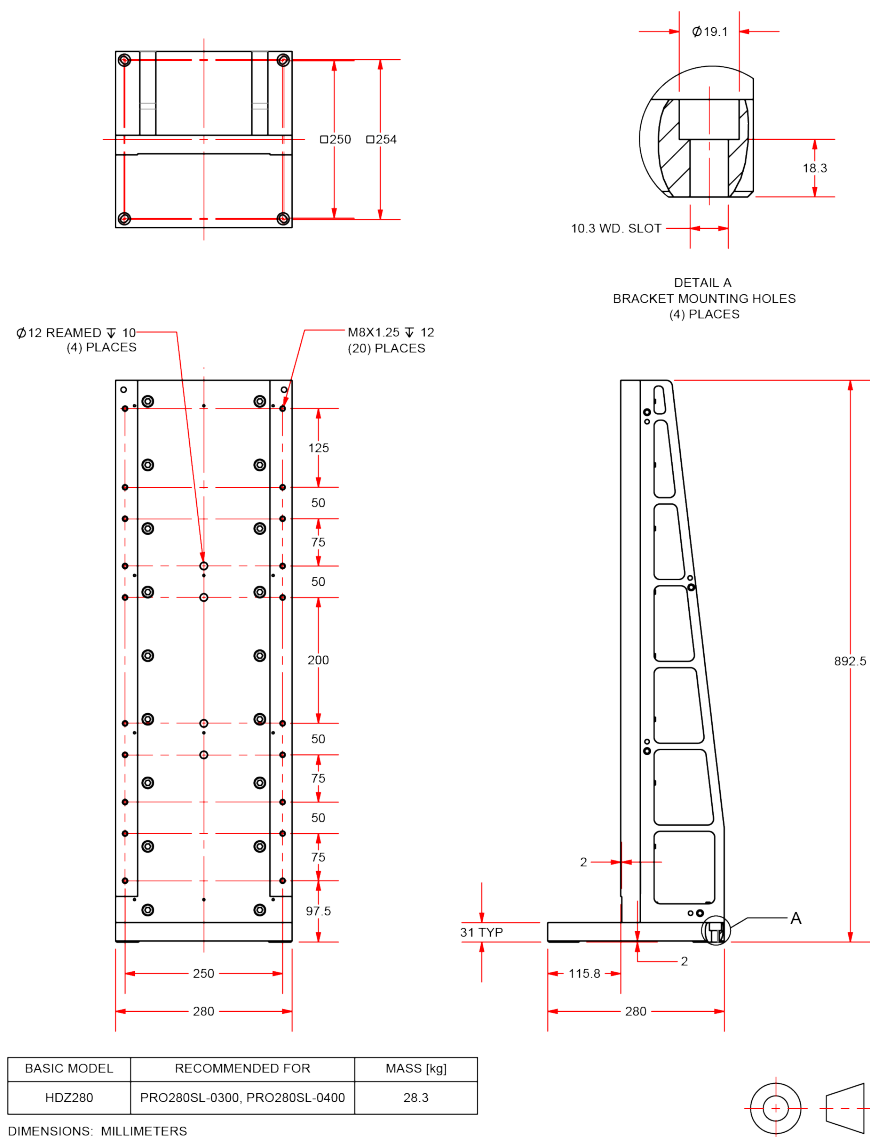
PRO280SL/SLE Z-Axis Bracket Dimensions
